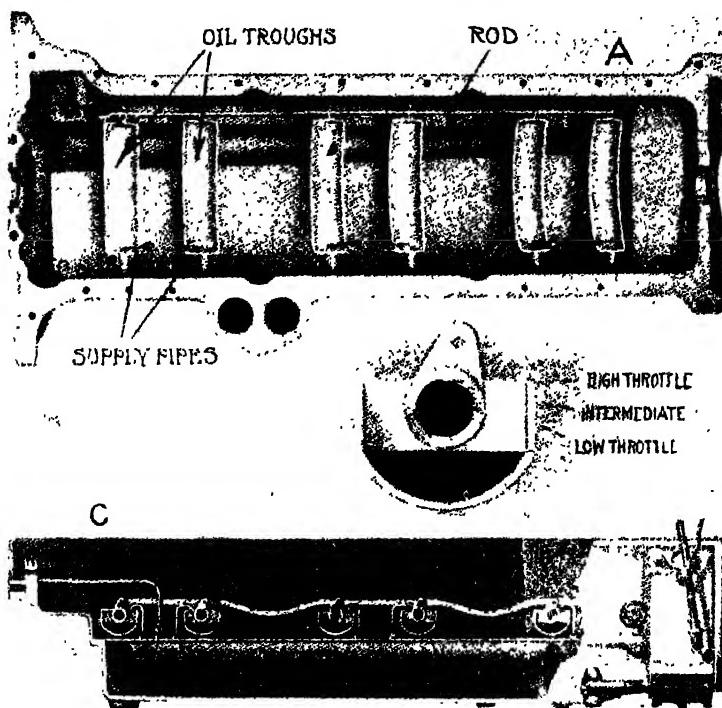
How Tilting Troughs, Regulated by the Throttle Control, Vary the Oil Supply for Different Engine Speeds.
